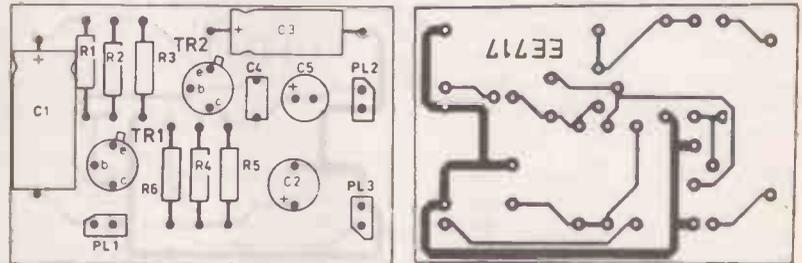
P.C.B. layout for the general purpose transistor amplifier module
